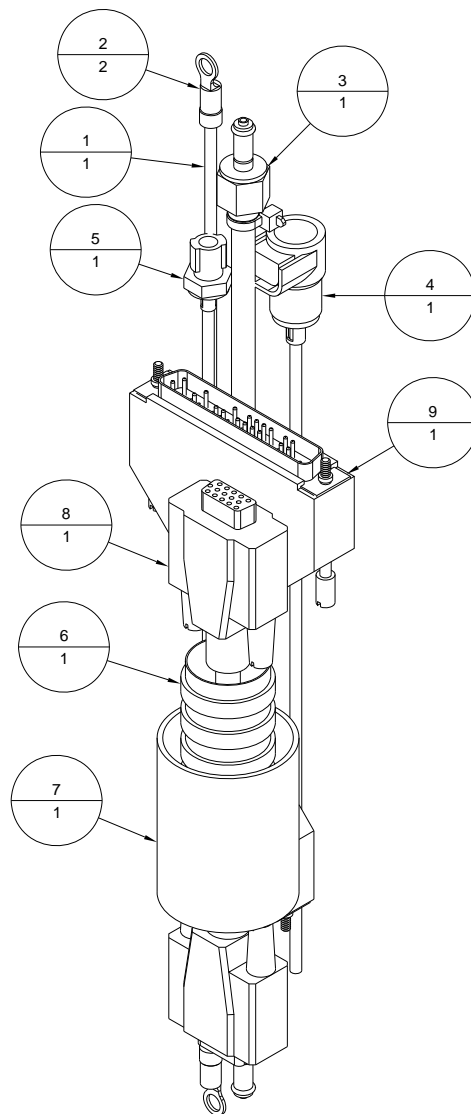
9102220A - Umbilical Assembly, BK791, BK1710, 15'
